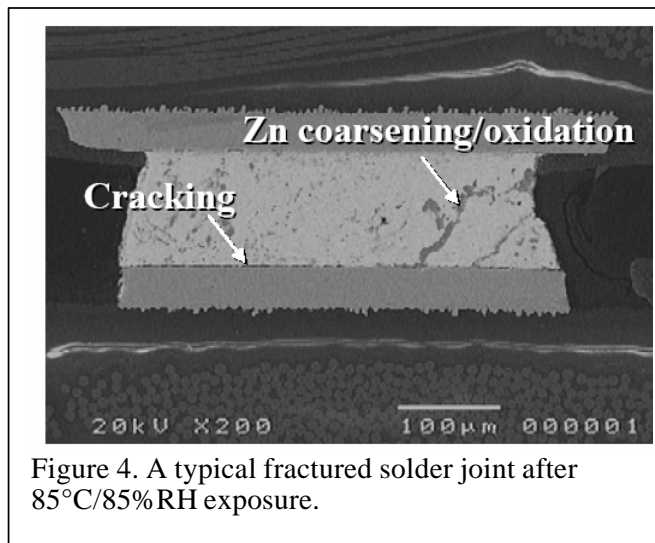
A typical fractured solder joint after 85°C/85%RH exposure.
